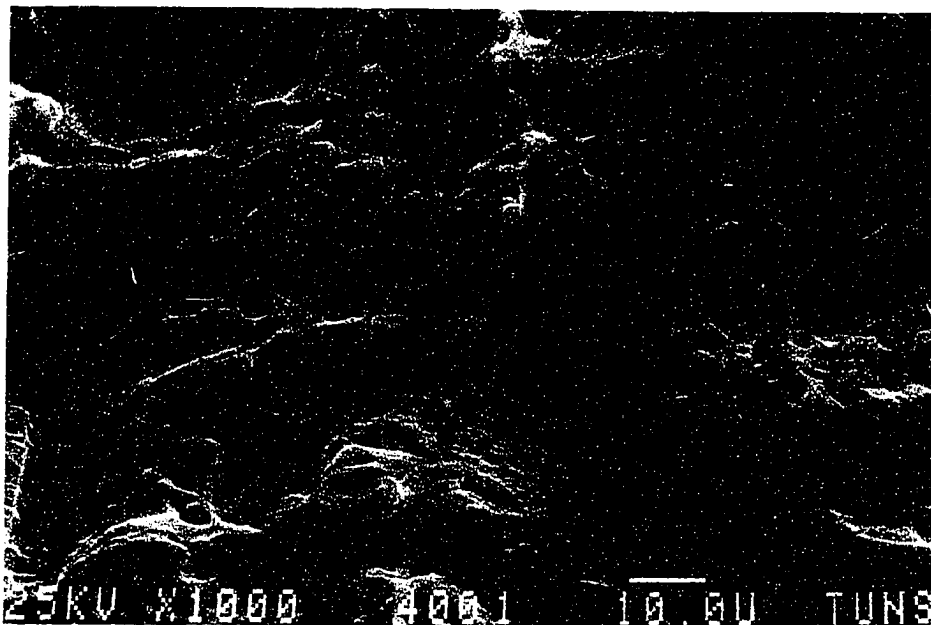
Appearance of a fracture surface produced in a ternary alloy standard sintered for 4h.
